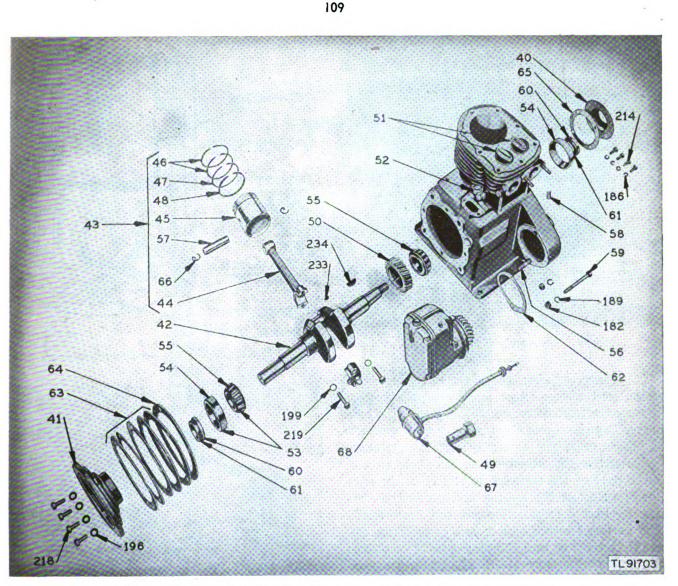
Crankshaft, bearing plate, piston, and connecting rod assembly.
